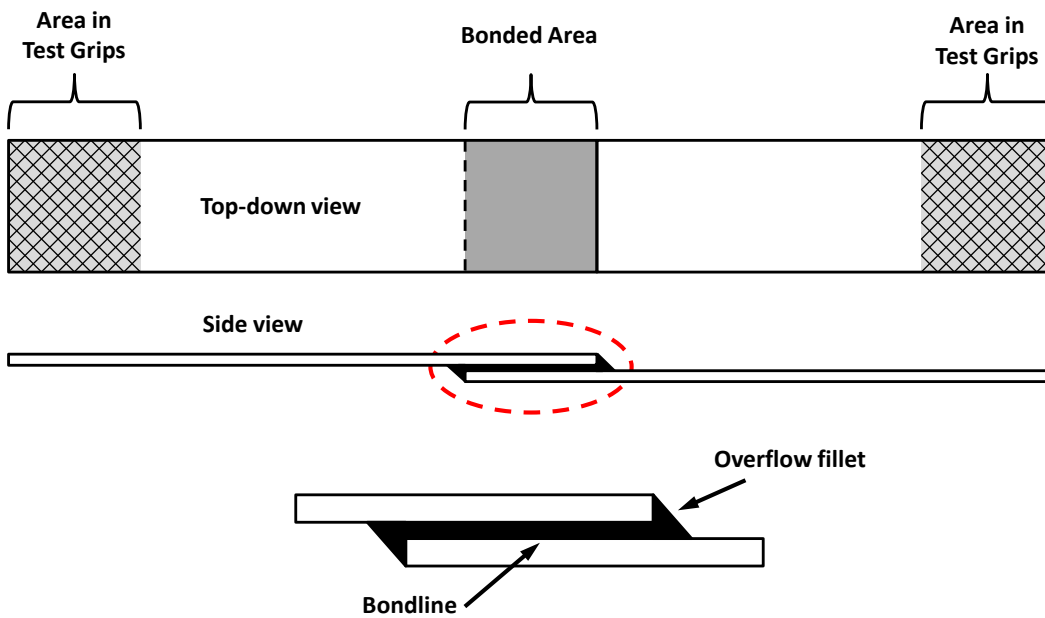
Illustration of the adhesively bonded single-lap-joint test specimen configuration (refer to ASTM D1002-10 for dimensions)
